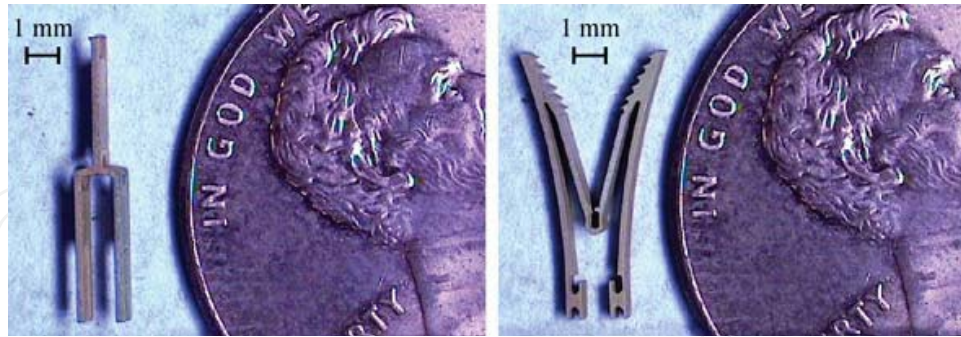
Fabricated arm joint and gripper machined by electrical discharge machining
